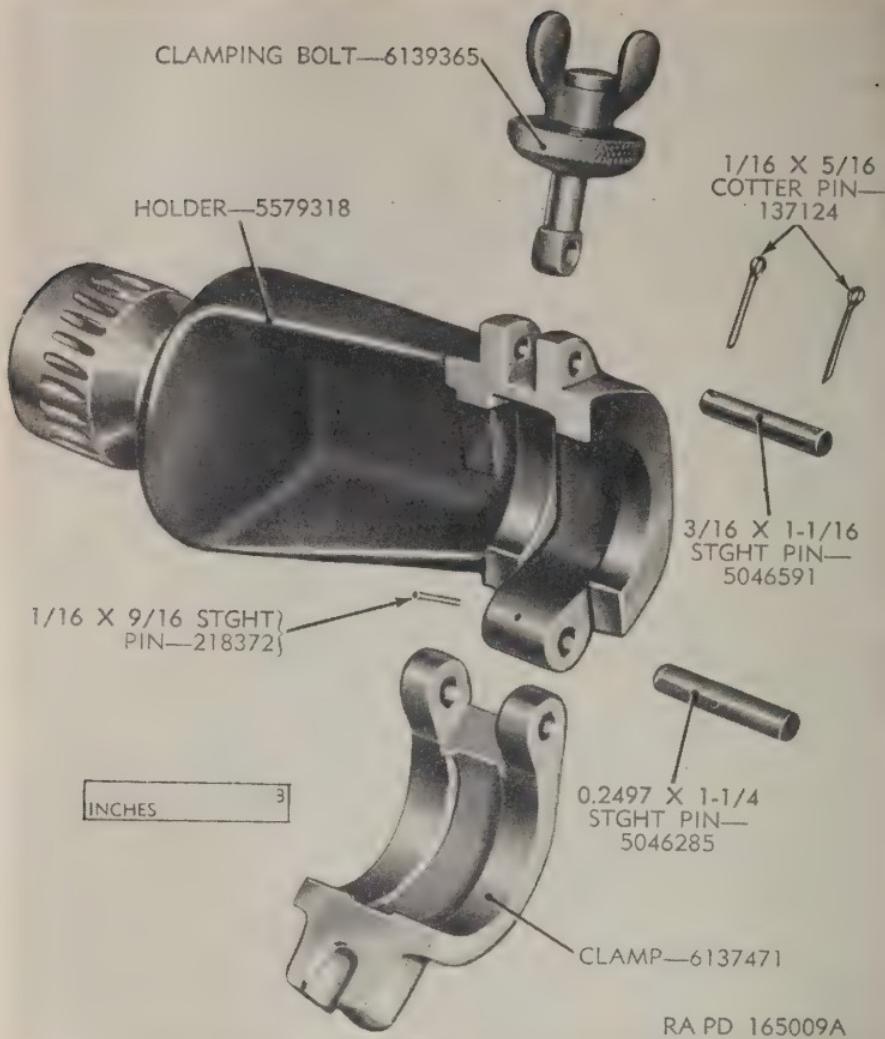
Telescope mount M28—telescope holder assembly—exploded view.
